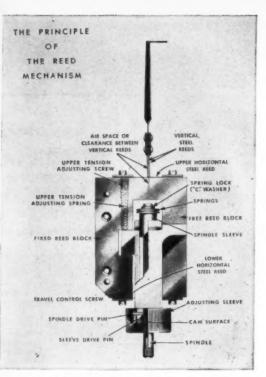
The reed mechanism in detail. (Courtesy The Sheffield Corp.)
